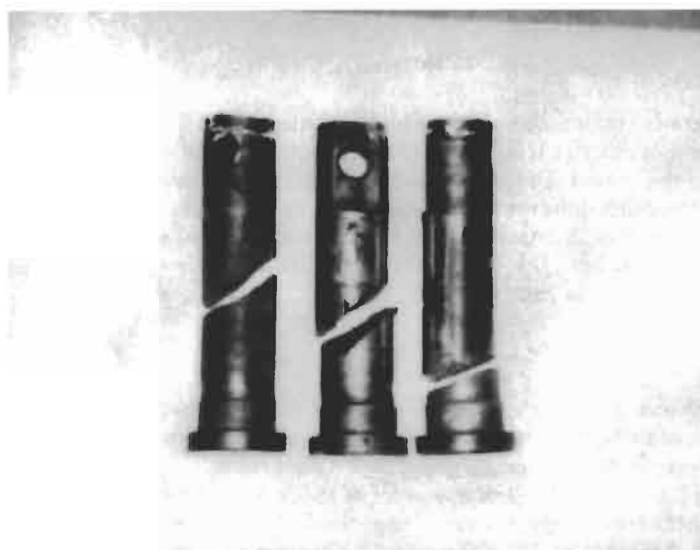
Three fractured pins showing the position and angle of the fractures.
